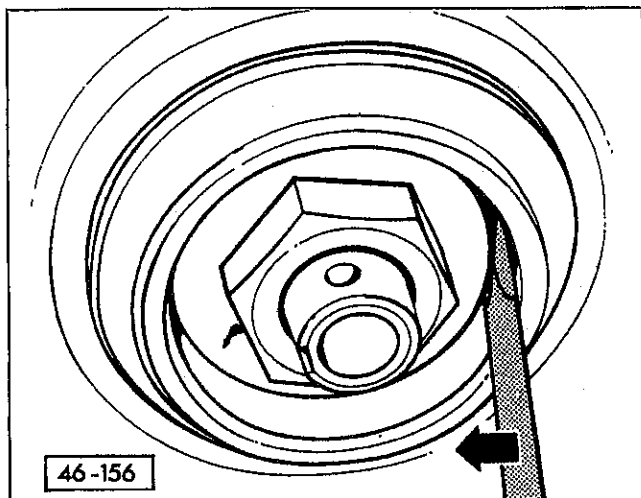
Wheel bearing adjustment being checked. Axle nut is tightened correctly when thrust washer moves only with slight pressure.
